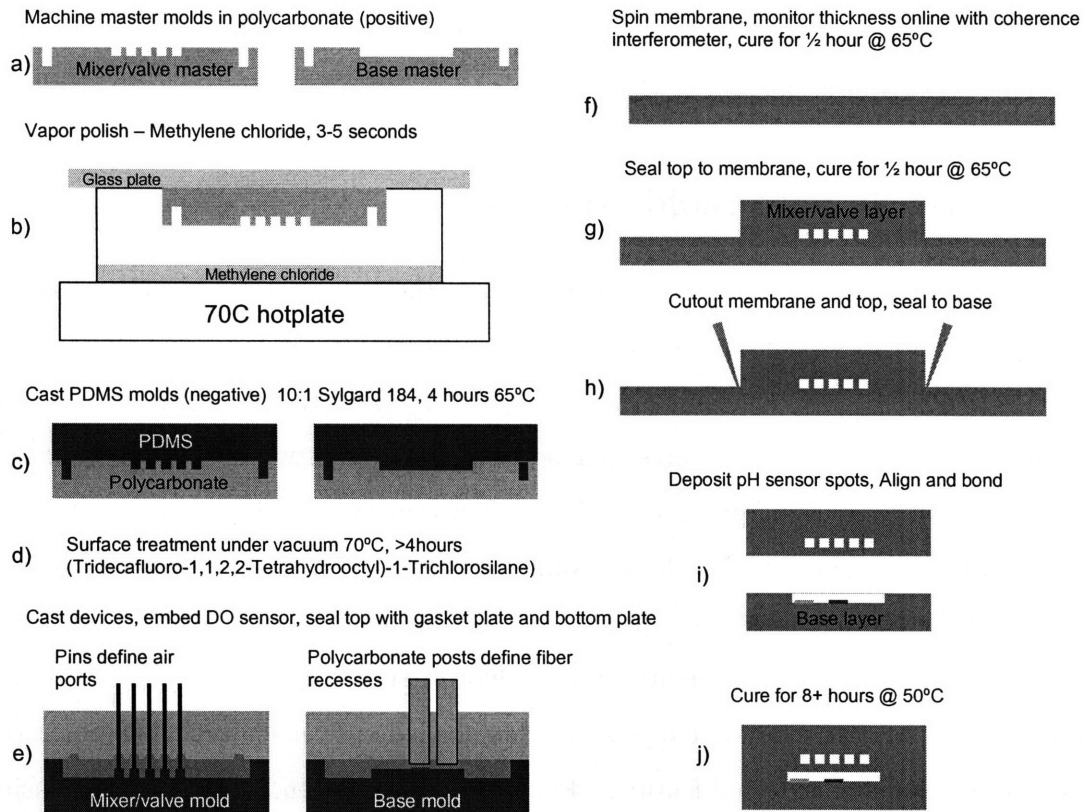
Device fabrication steps. a) Machine positive master molds with a computer numeric controlled milling machine. b) Polish molds in methylene chloride vapor to eliminate microscopic tooling marks for optical clarity and easy mold release. c) Cast negative device fabrication molds from PDMS. d) Treat the surface with a fluorosilane compound to prevent adhesion to PDMS. e) Cast the devices using the negative PDMS molds, which define internal device features, and polycarbonate molds, which define external device features. Embed oxygen sensors into base layer and cure for 1 hour at 65°C f) Spin coat a fluorosilane treated silicon wafer with PDMS, monitoring the thickness with a low coherence interferometer. Cure for 30min g) De-mold mixer and valve device layer and bond to partially cured membrane. Cure for 30min h) cut the excess membrane and peel mixer and valve device layer from the silicon wafer. i) De-mold the base layer. Deposit pH sensor in base layer, align with mixer and valve layer and seal. j) Cure for 8 hours at 50°C.
